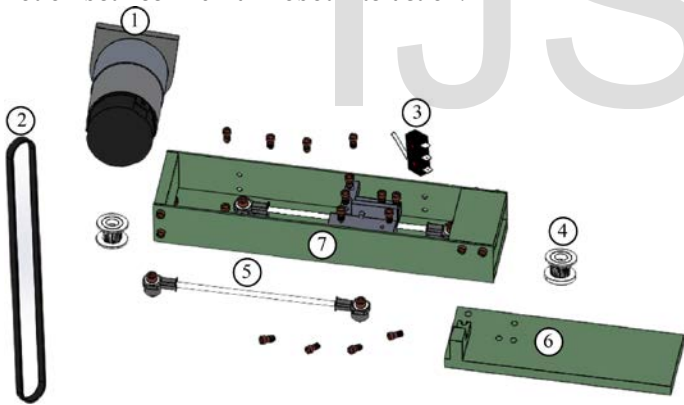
Exploded View of the Force Control 1-DOF Belt Drive Mechanism
